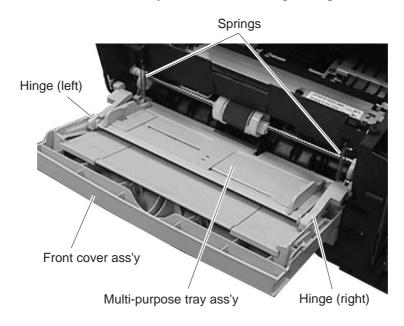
Paper Pick-up Roller (multi-purpose) 5
